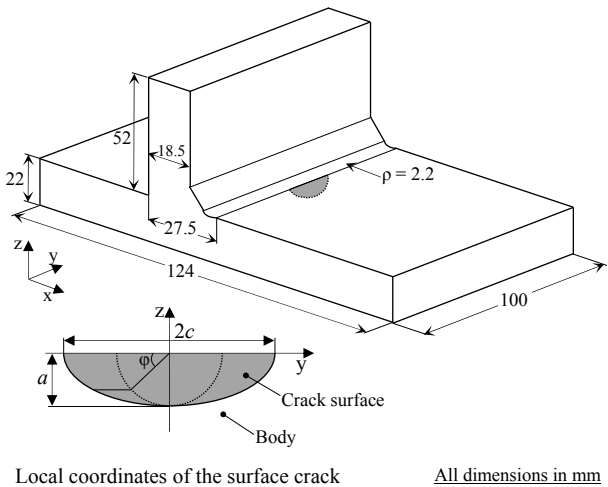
Geometry of the surface cracked T-butt welded body. (Note: ρ is the radius of the weld toe).
